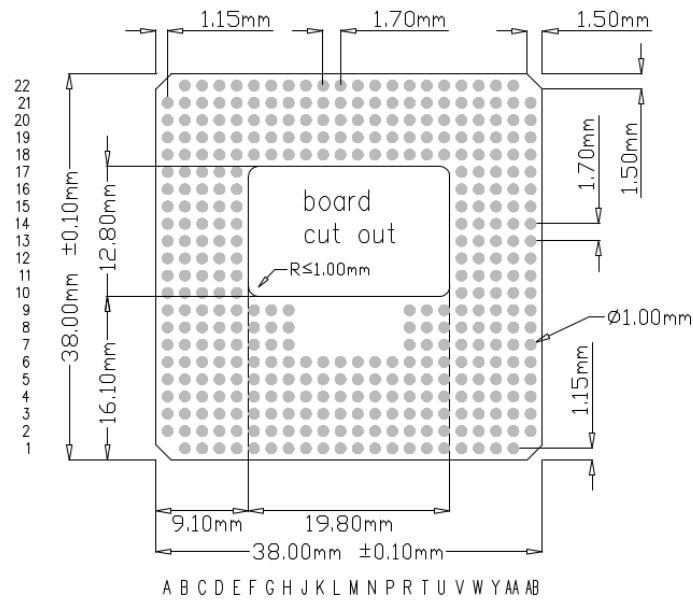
Recommended PCB land pattern for TQMaX4XxL, top view through TQMaX4XxL
